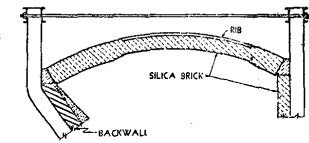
Partial cross-section of basic open-hearth steel furnace showing silica brick roof with thickened roof section near back and front walls
